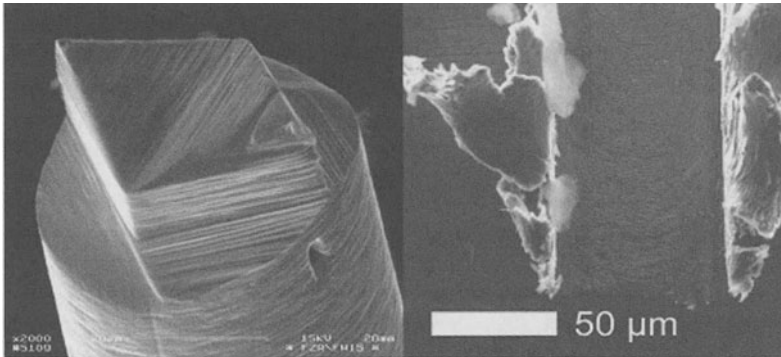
Ion milled two fluted end mill (l.) and detail of manufacturing sample (r.)
